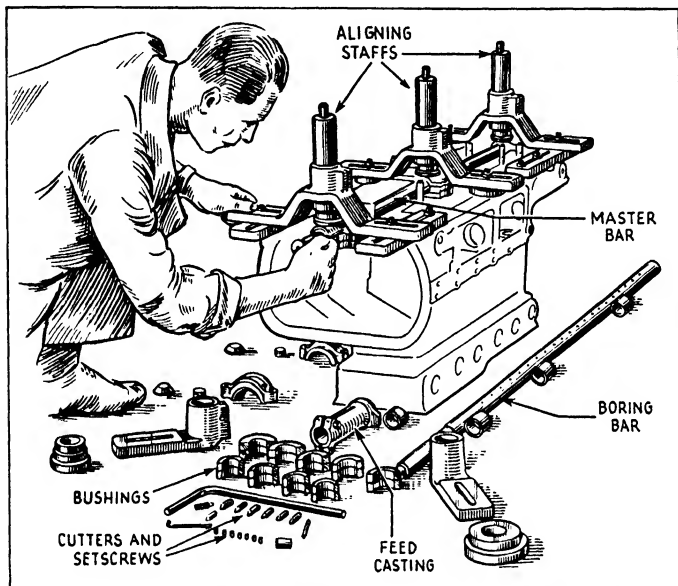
SETTING UP A NEWTON UNIVERSAL BORING BAR TO BORE CRANKSHAFT BEARINGS IN LINE
